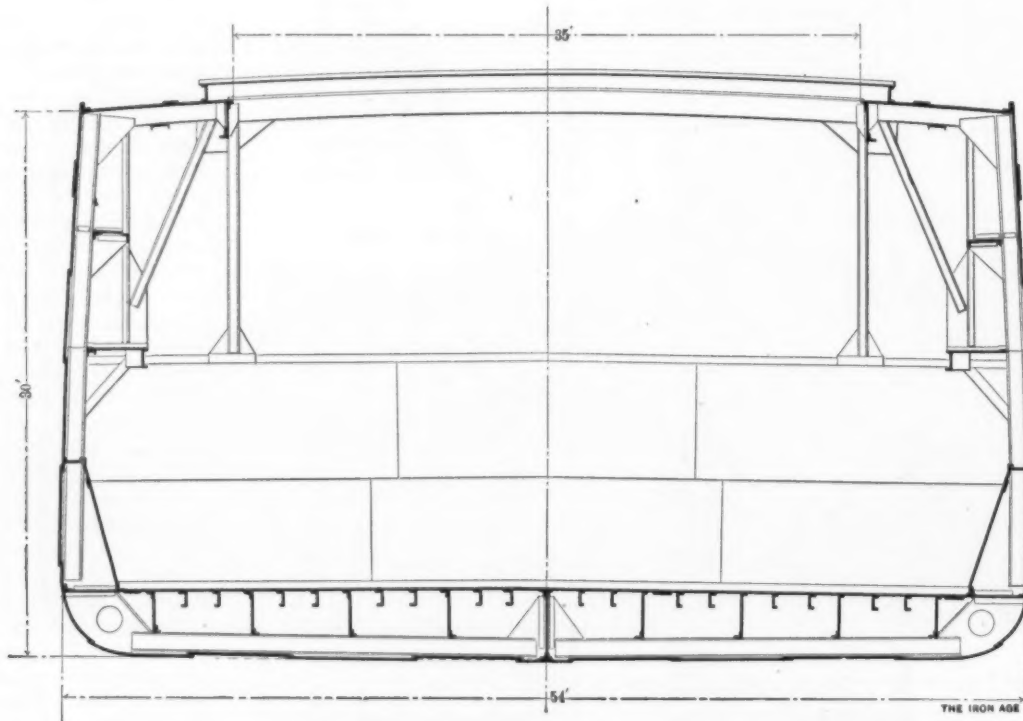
Beam Section through Hopper, Showing Steel Shapes and Method of Construction
